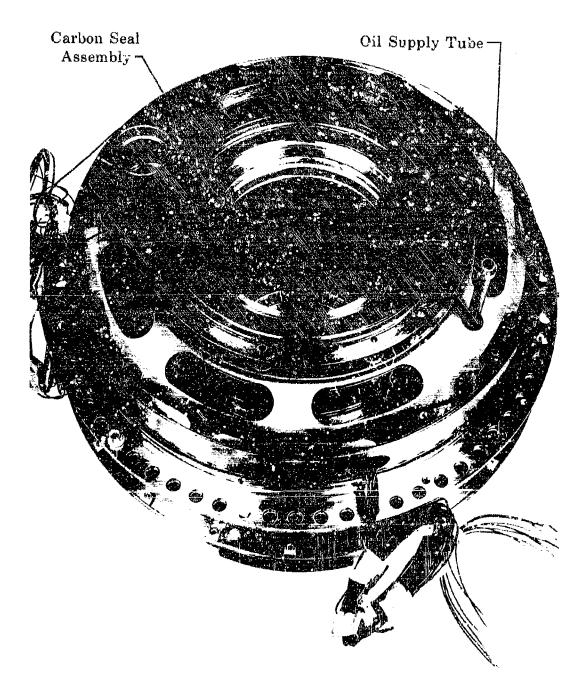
, No. 1 Hub and Support, Rear View FD 15612 with Middle Seal Assembly
